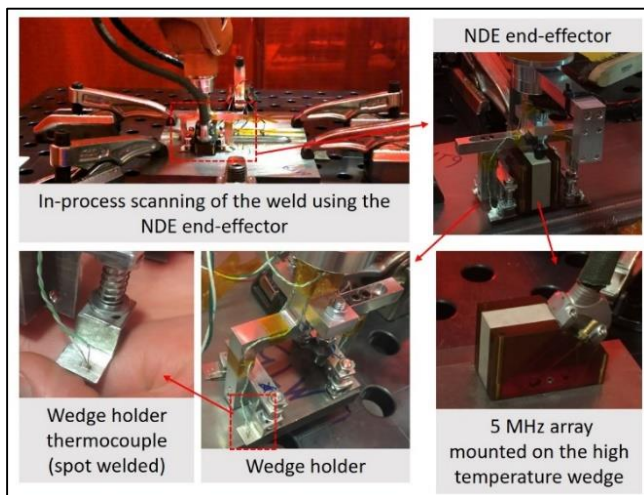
IN-PROCESS SCANNING OF THE WELD USING THE NDE END-EFFECTOR
